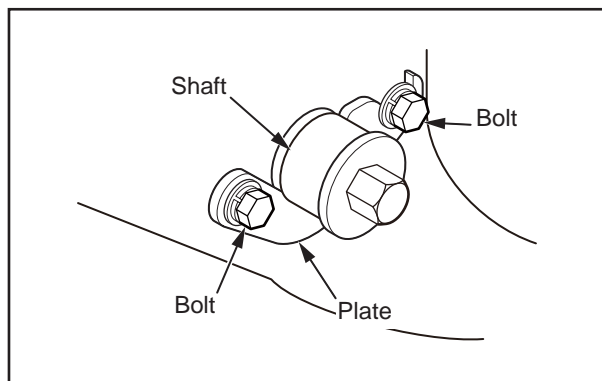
Manual Turning Gear Position (While Engine is Running)
